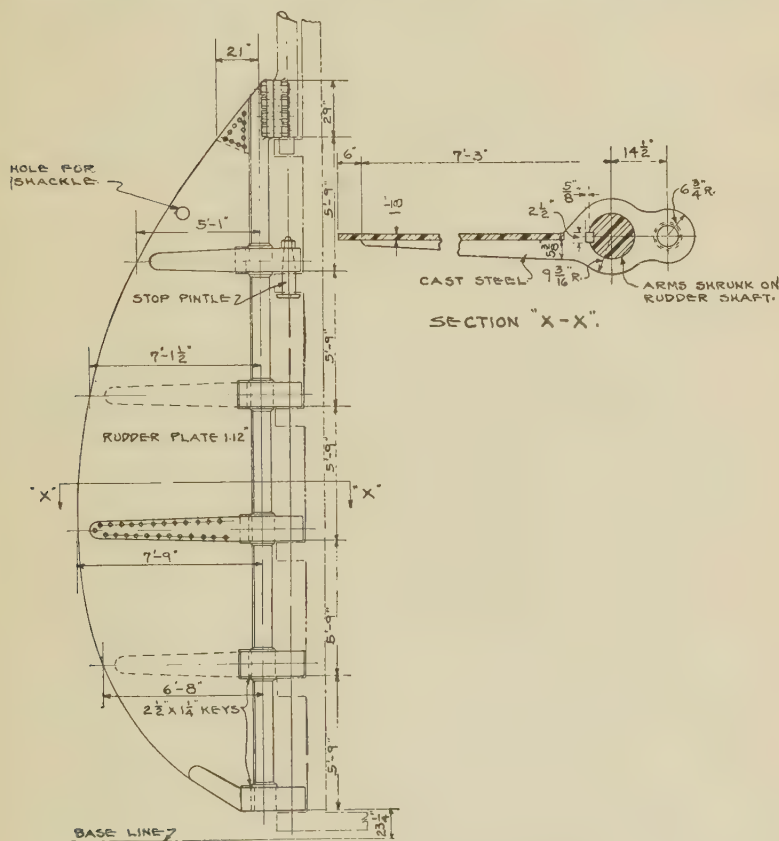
Riveted rudder for 13,220-ton dead-weight freighter.
